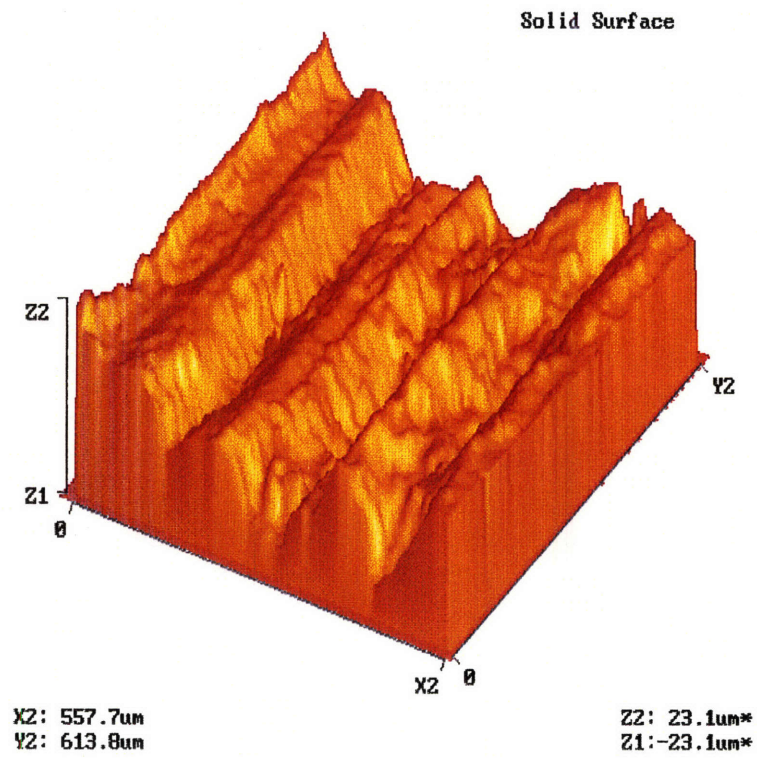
Surface map of the gear root from the supplier manufactured gear.
